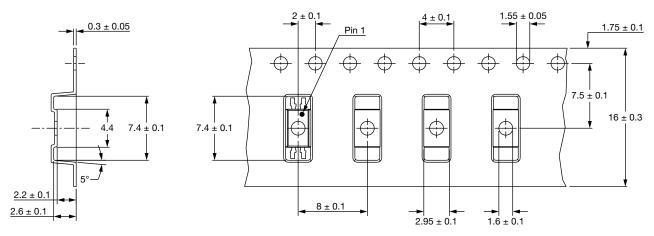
Tape and Reel Packing (3000 parts per reel)
